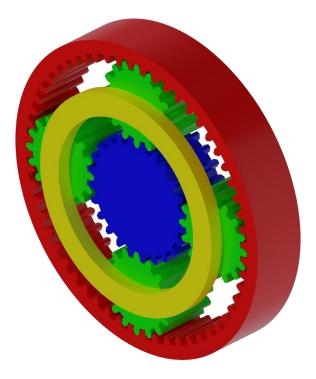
Planetary gearing with ring gear (red), sun gear (blue), planet gears (green) and carrier (yellow).
